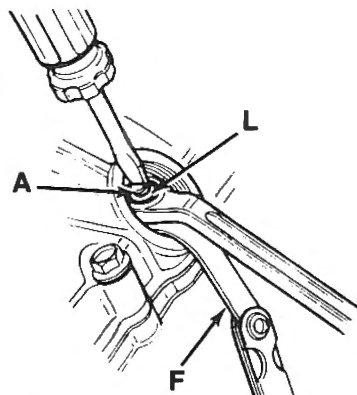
Measure valve clearance with feeler gauge (F). Loosen locknut (L) and rotate screw (A) to adjust.
